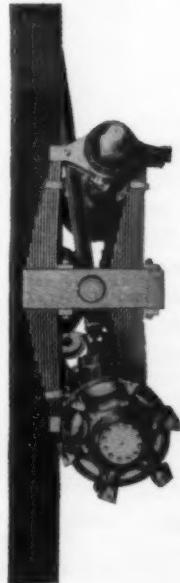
Original design with castings weighed 74 lbs. Required extensive machining. Assembly had 5 costly components.
